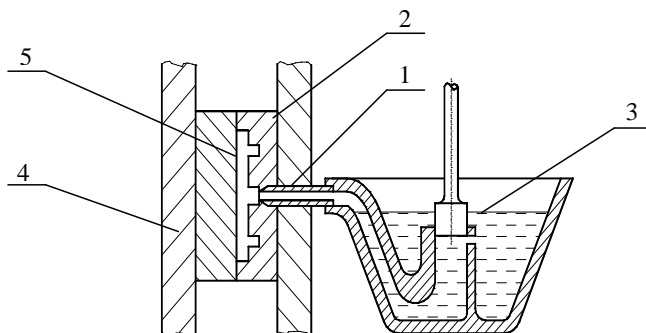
Schematic principle of hot chamber pressure die casting in melting system injection piston, 2 - movable part of die, 3 - molten zinc, 4 - stationary part of die, 5- casting,
